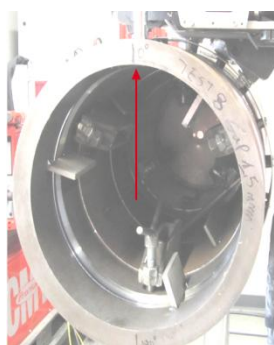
Welding position 12 o'clock (5Gd)
